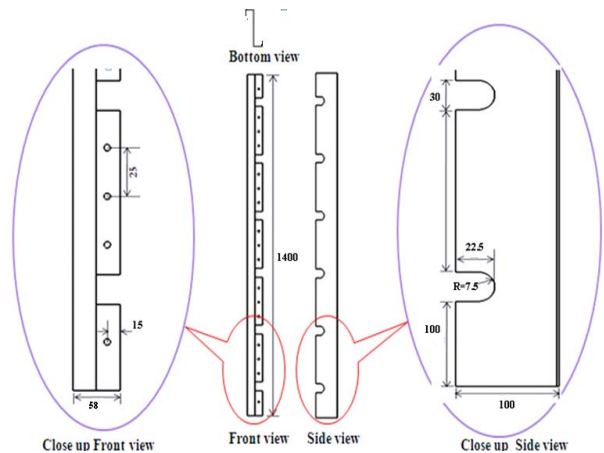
Front, side and bottom view of the Bulkhead with dimensions
